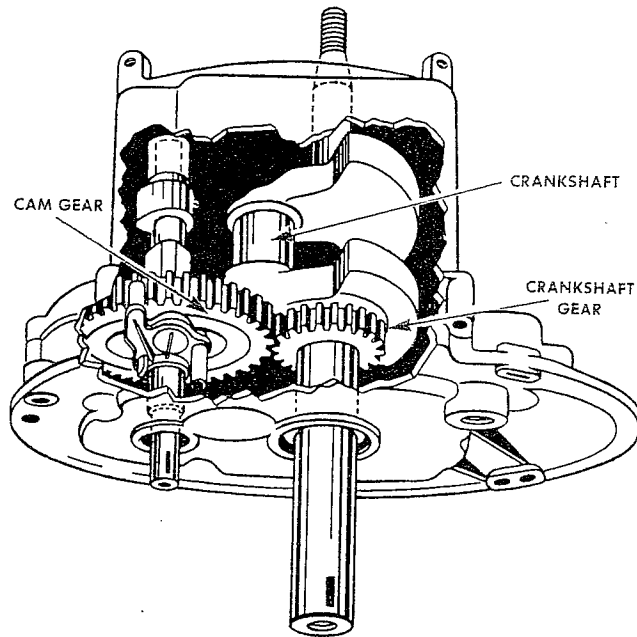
A gear on the crankshaft turns a gear on the camshaft. (Clinton Engines Corp.)
